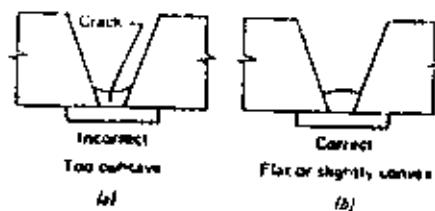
A concave root pass (a) may crack because tensile stresses exceed the strength of the weld metal. A slightly convex root pass (b) helps prevent cracking.
